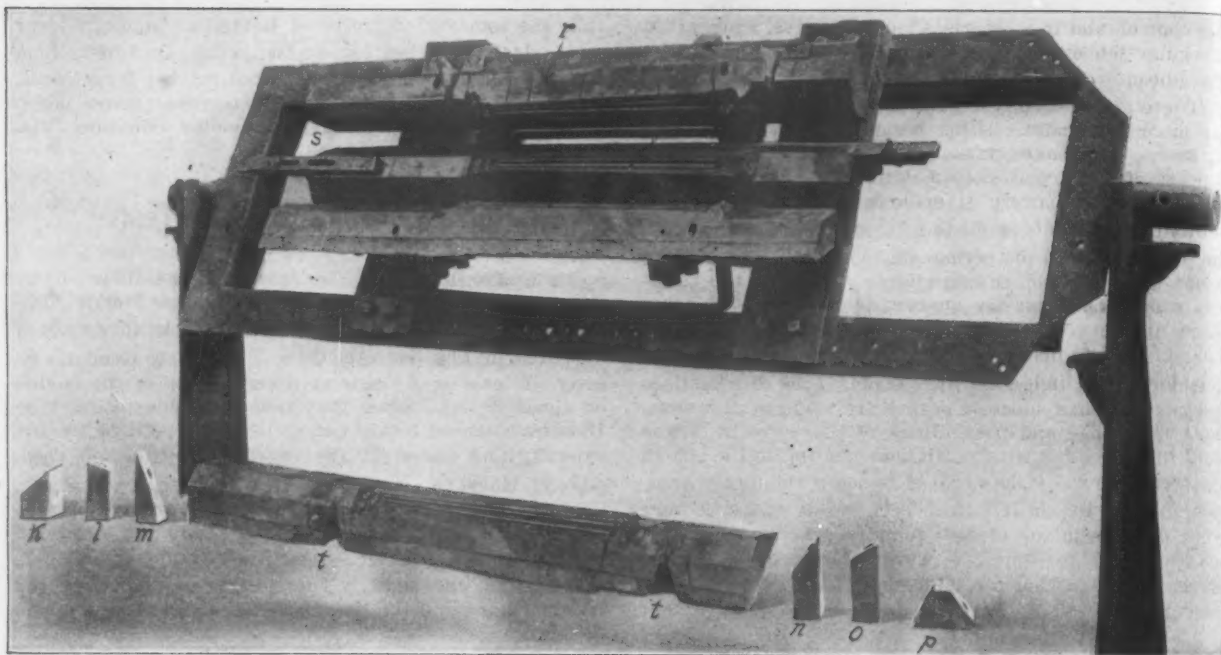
The Mold on Its Frame, with Gates and Vents.—Detachable Rake Pieces.
